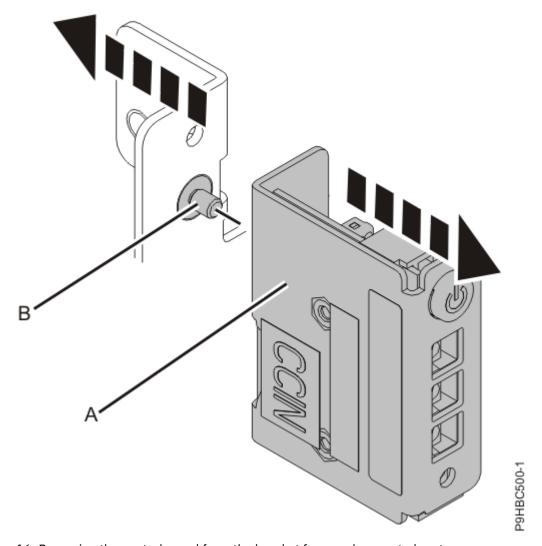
Removing the control panel from the bracket for a rack-mounted system
